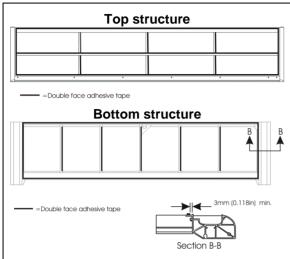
TOP AND BOTTOM PANEL INSTALLATION DOUBLE FACE ADHESIVE TAPE APPLICATION
